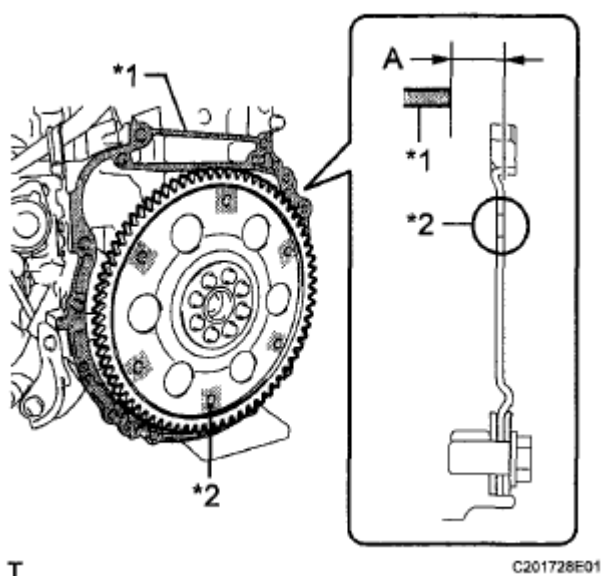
Measuring Dimension A Between Transaxle Fitting Surface And Converter Fitting Surface
